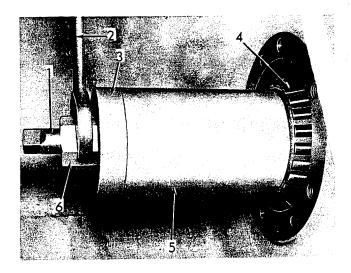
Installing Bevel Gear Shaft Bearing Cone (T-17899)
